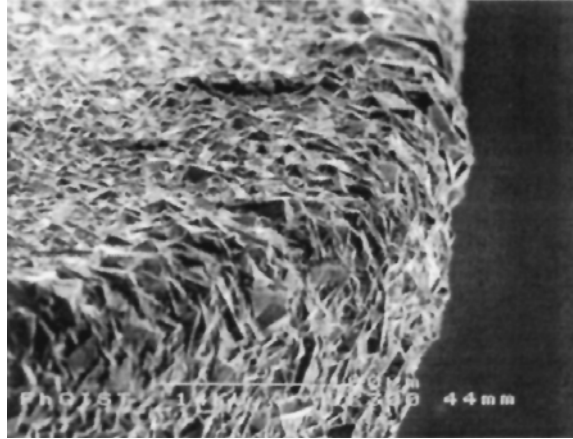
Morphology of cutting edge of diamond-coated tool insert.
